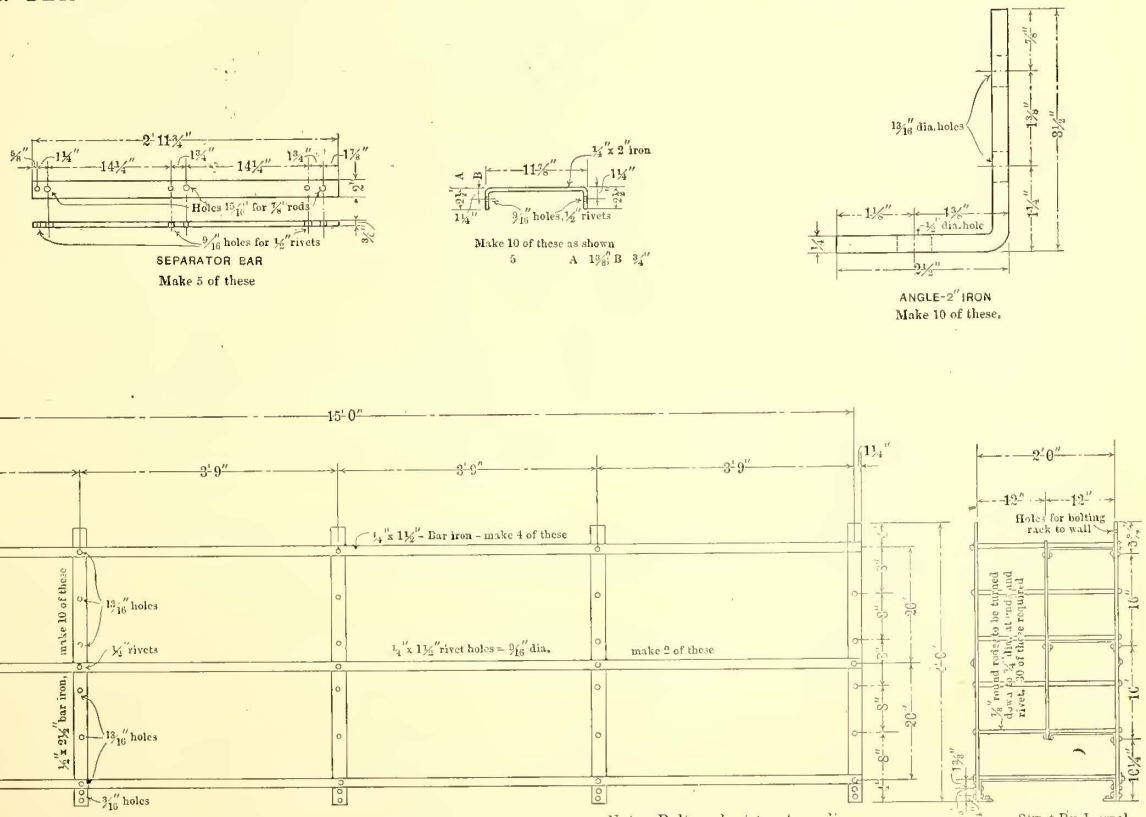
CONSTRUCTION DETAILS OF IRON RACK USED AT THE THIRTY-SIXTH STREET SHOP FOR STORING TROLLEY-POLE TUBING AND THE LIKE
